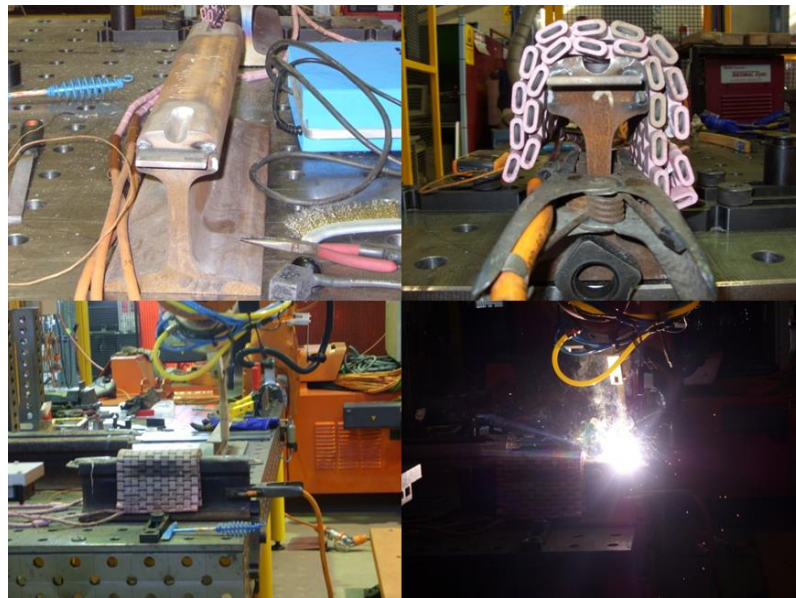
Welding table with a set of clamps and accessories. Electric resistance heating blanket used to preheat the rail head
